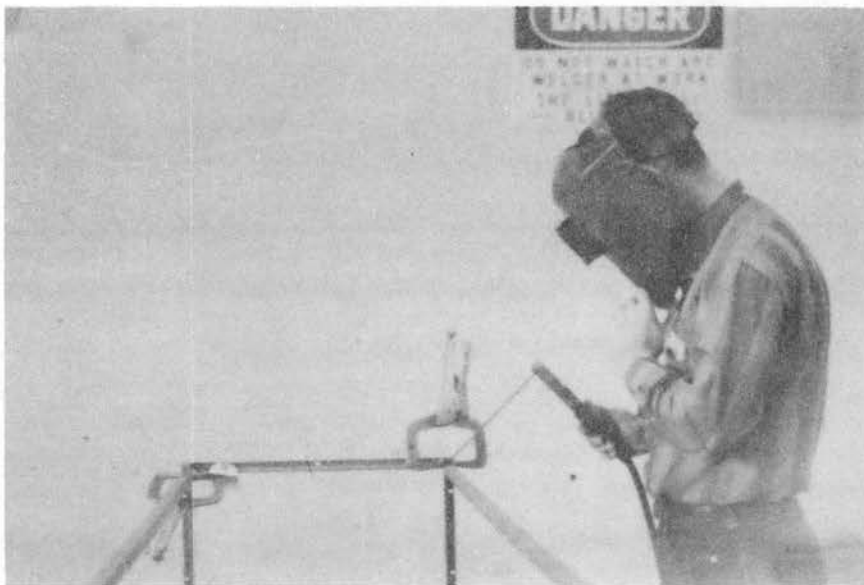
Top Braces Being Welded to the End Pieces
